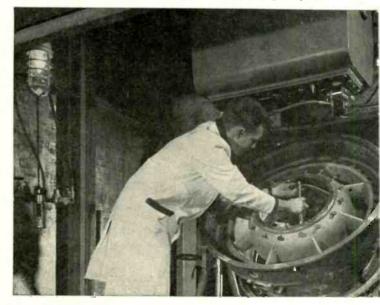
A self-contained industrial radiographic machine is used here to look for material defects in aircraft engine parts.
